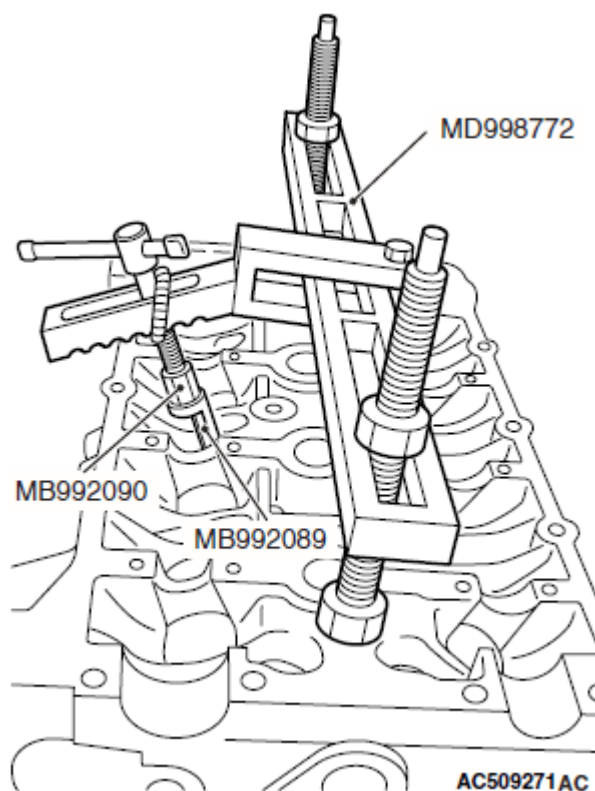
Removing Valve Spring Retainer Lock Using Special Tool MB992090
